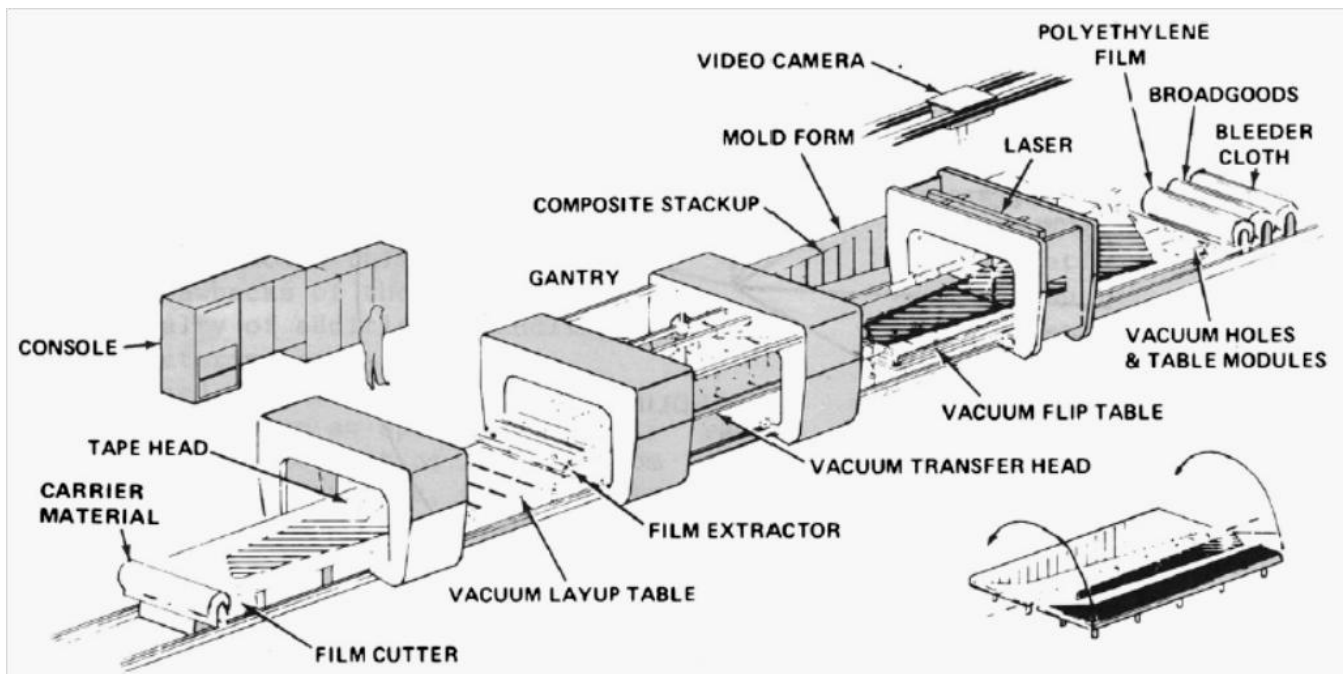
Drawing of an early composite components manufacturing system. [5] The material is moved from left to right and material is applied to a mould using a bespoke tape layup head.
